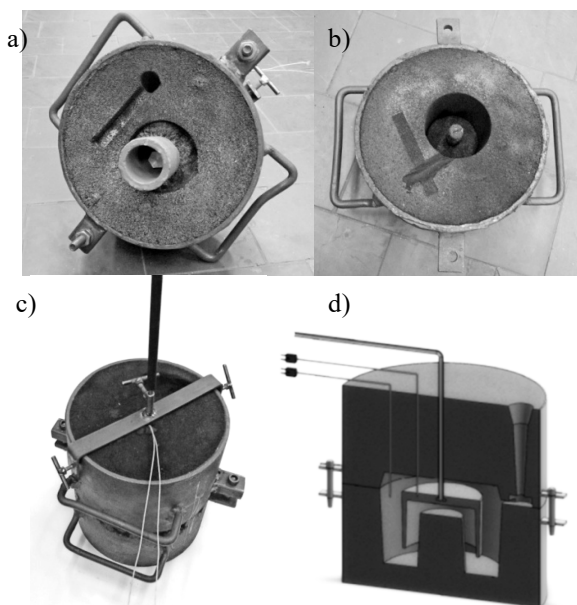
Sand mould: a – cope with core, b – drag, c – prepared to pouring with liquid metal, d – section
